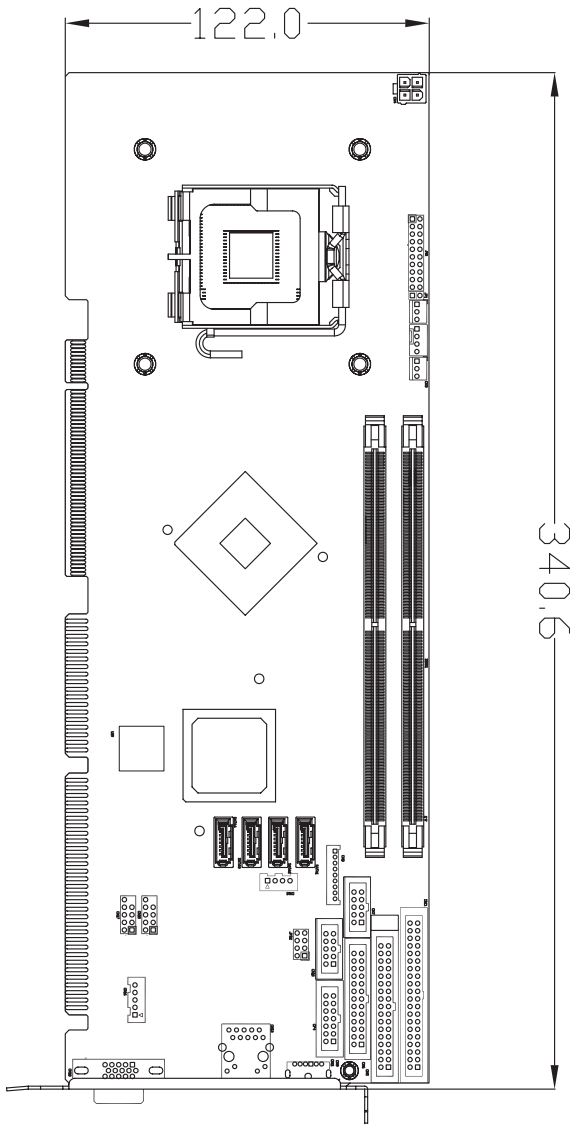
NuPRO-A301 Board Dimensions (top view)
